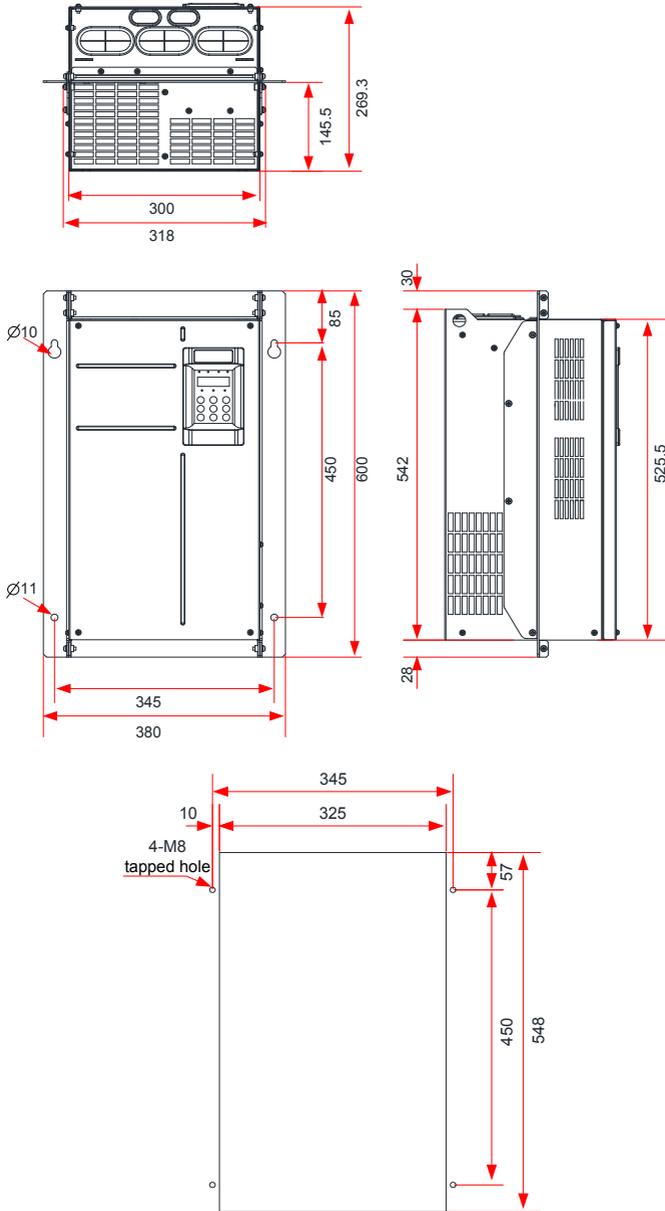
Intermediate mounting bracket dimensions and hole spacing for 45-55 kW AC drive models
